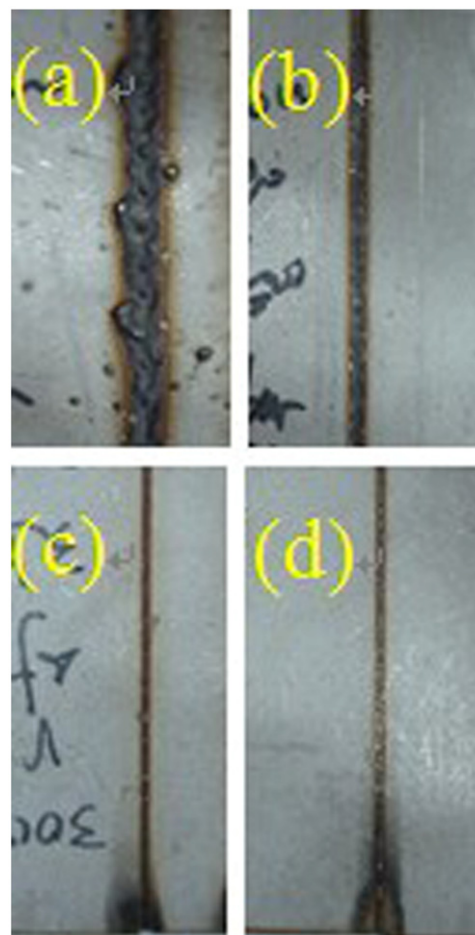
Typical appearances of the fiber laser welds with a laser power of 3000 W. (a) the positive appearance at the welding speeds of 30 mm/s, (b) the positive appearance under welding speeds of 40 mm/s, (c) the reverse appearance at the welding speeds of 30 mm/s, and (d) the reverse appearance at the welding speeds of 40 mm/s.
